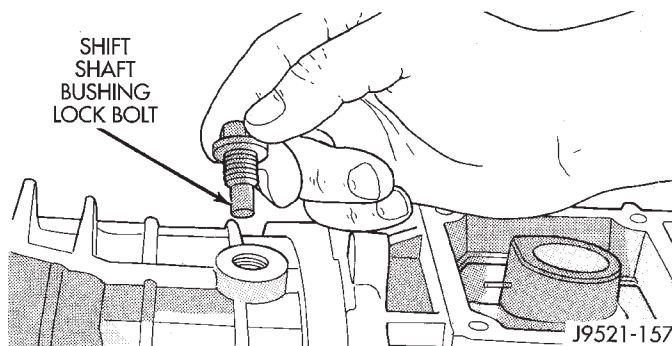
Installing Shift Shaft Bushing Lock Bolt
